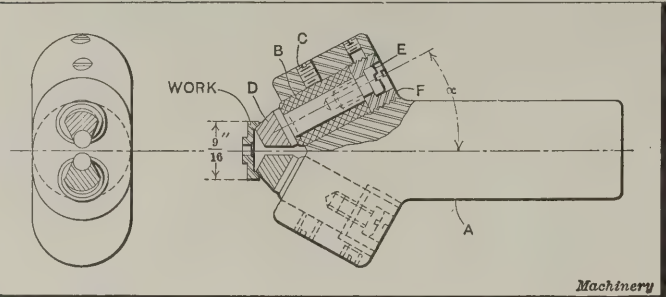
Special Knurls and Holder for Internal Bevel Knurling
